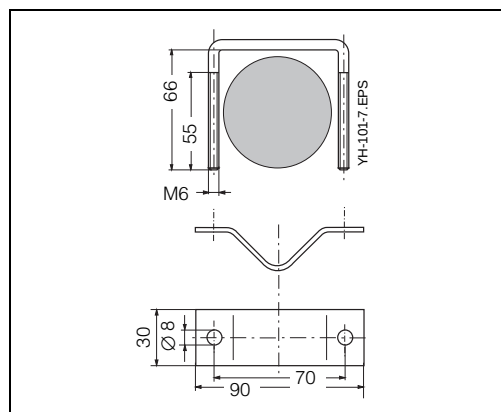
Post mounting kit for weather protection cover CYY 101, if not mounted to assembly holder CYH 101
